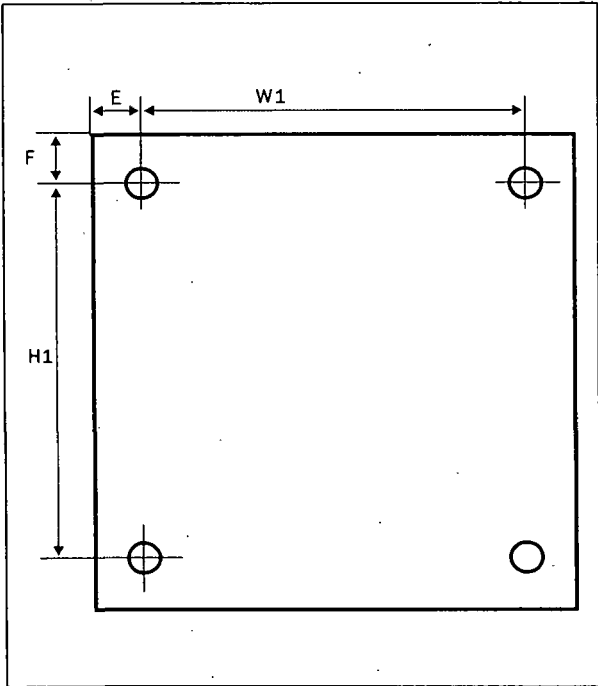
Hole pattern for screw attachment, MSF-310 to MSF-835. Hole distance (mm).
